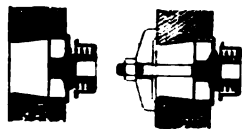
SECTION OF VALVES OF CYLINDER SHOWN IN FIG. 3.
